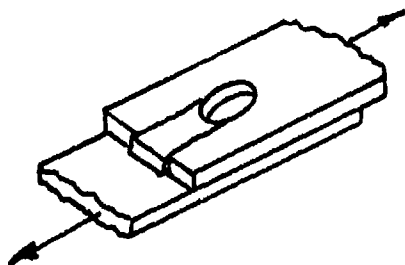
Single Rivet Specimens Used in Drop Weight Tests. Same Dimensions as Flush Head Specimens. All Dimensions in Centimeters.
